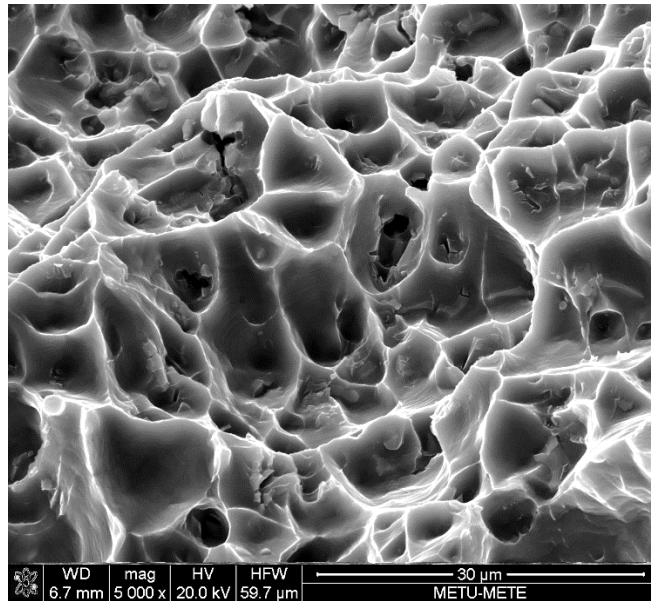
Fracture surface of the as-welded sample (fracture toughness test).
